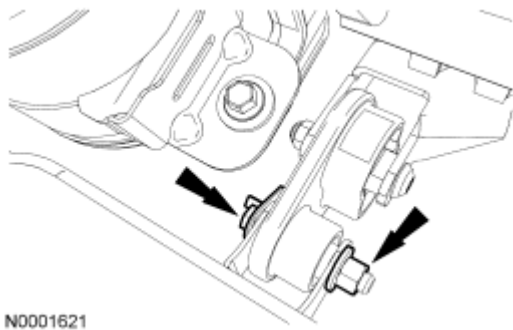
Locating Front Transaxle Stabilizer Bolt & Nut
